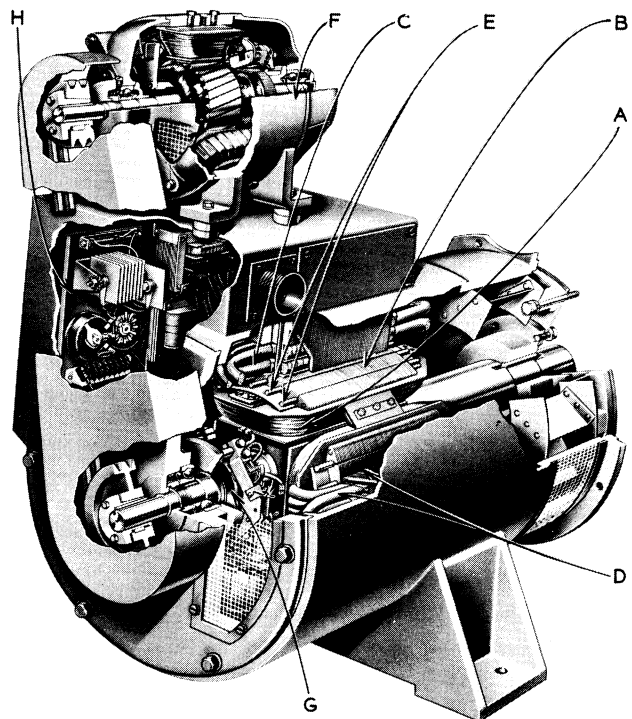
CUT-AWAY VIEW OF AN ALTERNATOR WITH A BELT DRIVEN D.C. EXCITER.
